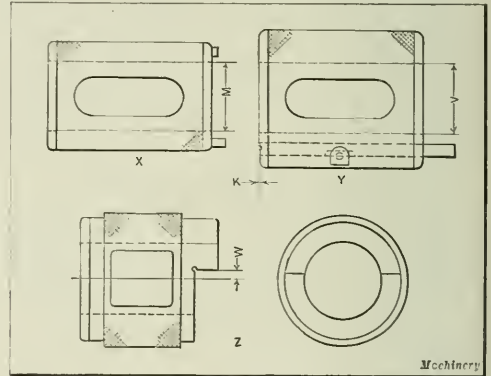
(X) Gage to which Taper of Arbor is turned; (Y) Flush-pin Gage for Final Inspection of Taper of Arbor; (Z) Gage for testing Alignment of Lugs after Assembly
